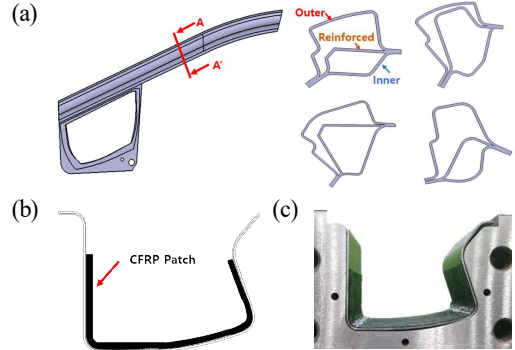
Test model of metal-CFRP hybrid A-pillar; (a) cross-section view of A-pillar; (b) the position of CFRP patch on the inner surface of undercut-shaped sheet metal part; (c) Lower mold with cartridge heaters installed for temperature control
